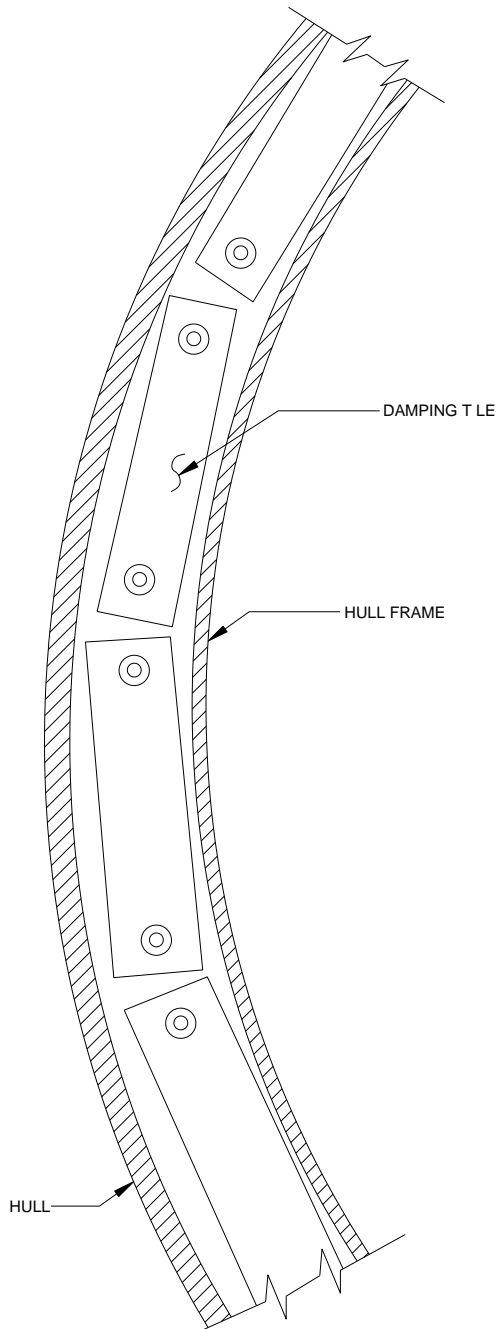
Typical installation of damping tiles on hull frames (not to scale).
